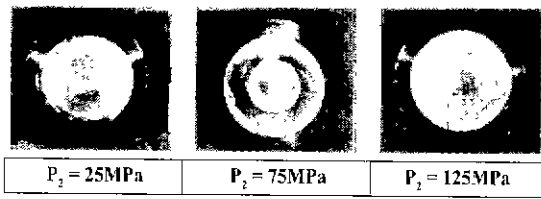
Fracture surface of STS304-Al6351 alloy welding specimens
